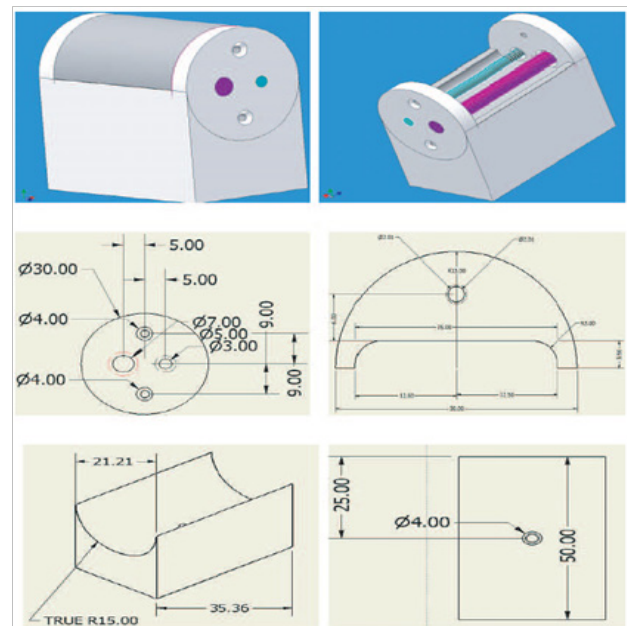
Oval shaped single-lamp closed-coupled cavity design using inventor professional.
